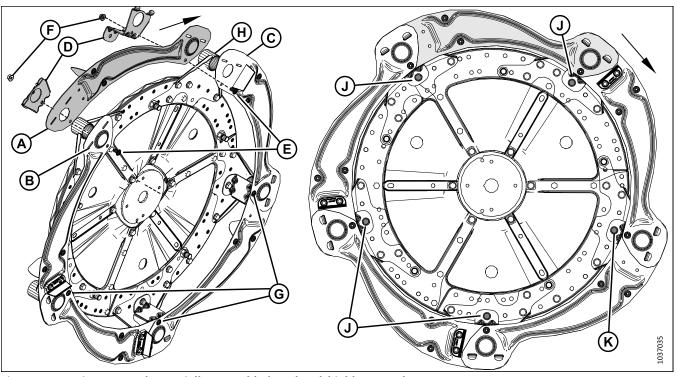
Five-Bat Reel – Partially Assembled Reel Endshields on Reel
